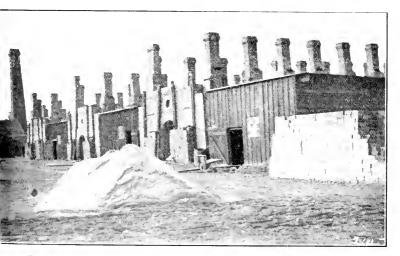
Rectangular down-draft kilns for buraing paving brick; Ontario Paving Brick Company.
